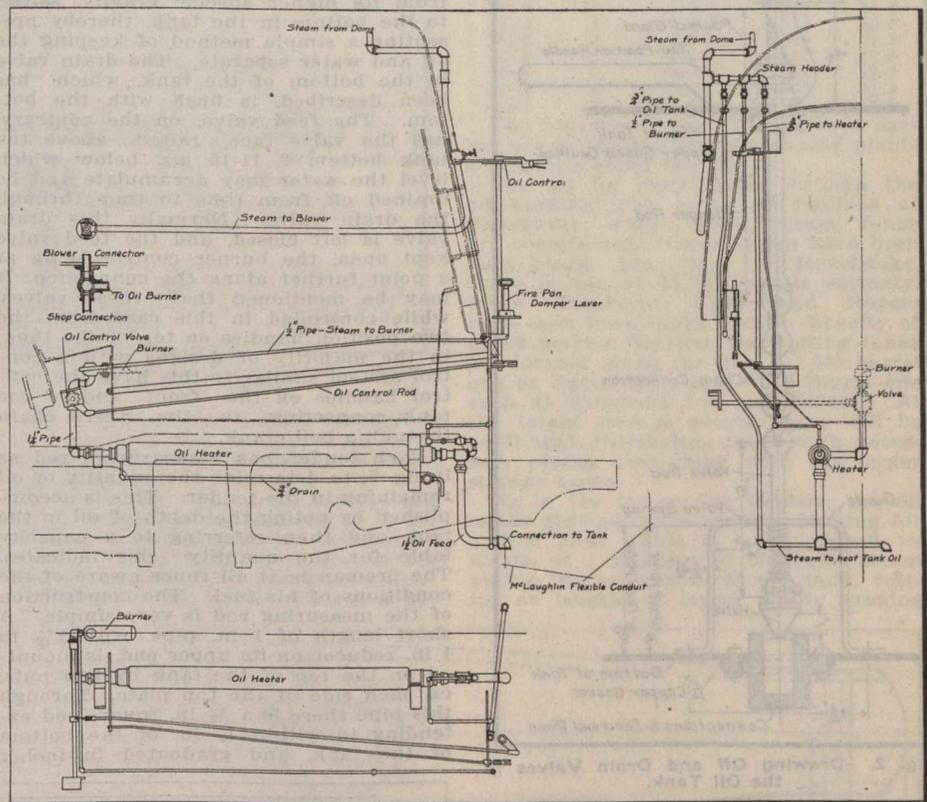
Piping Arrangement on C.P.R. Oil Burning Locomotives.
